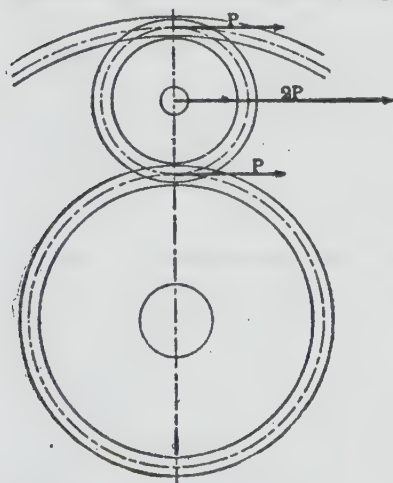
TANGENTIAL AND BEARING PRESSURES IN INTERNAL GEAR TYPE OF PLANETARY.
